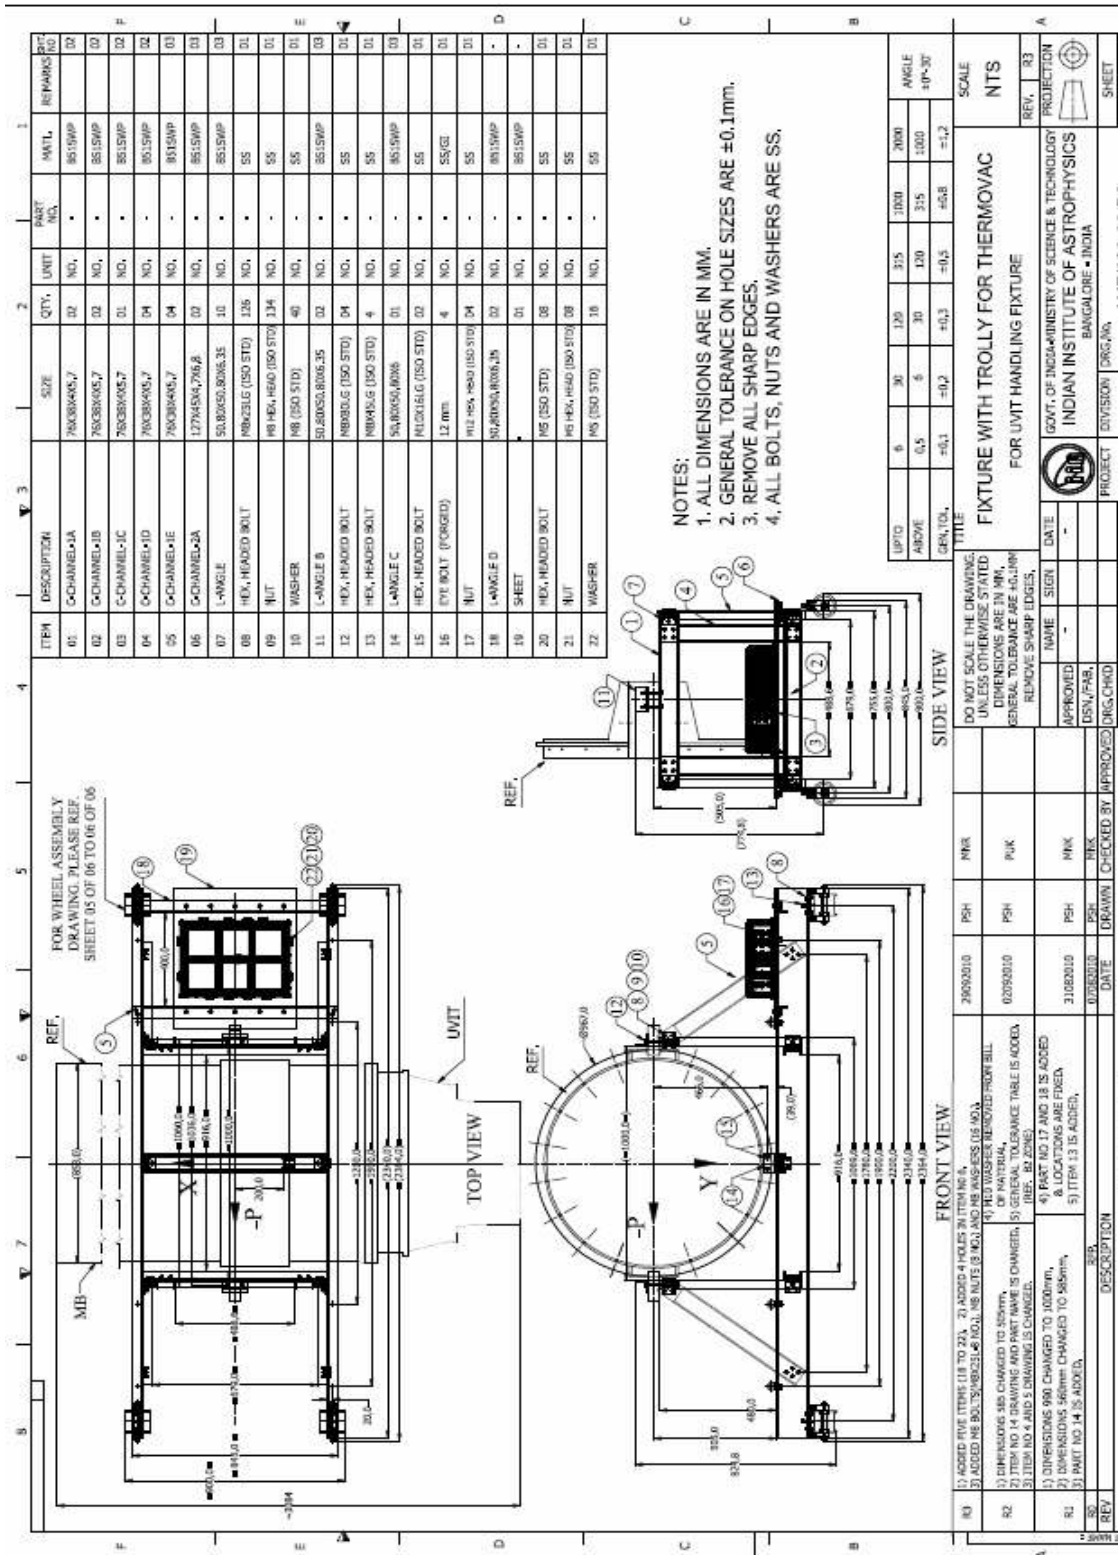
2 Mounting Fixture for UVIT payload in TVAC
